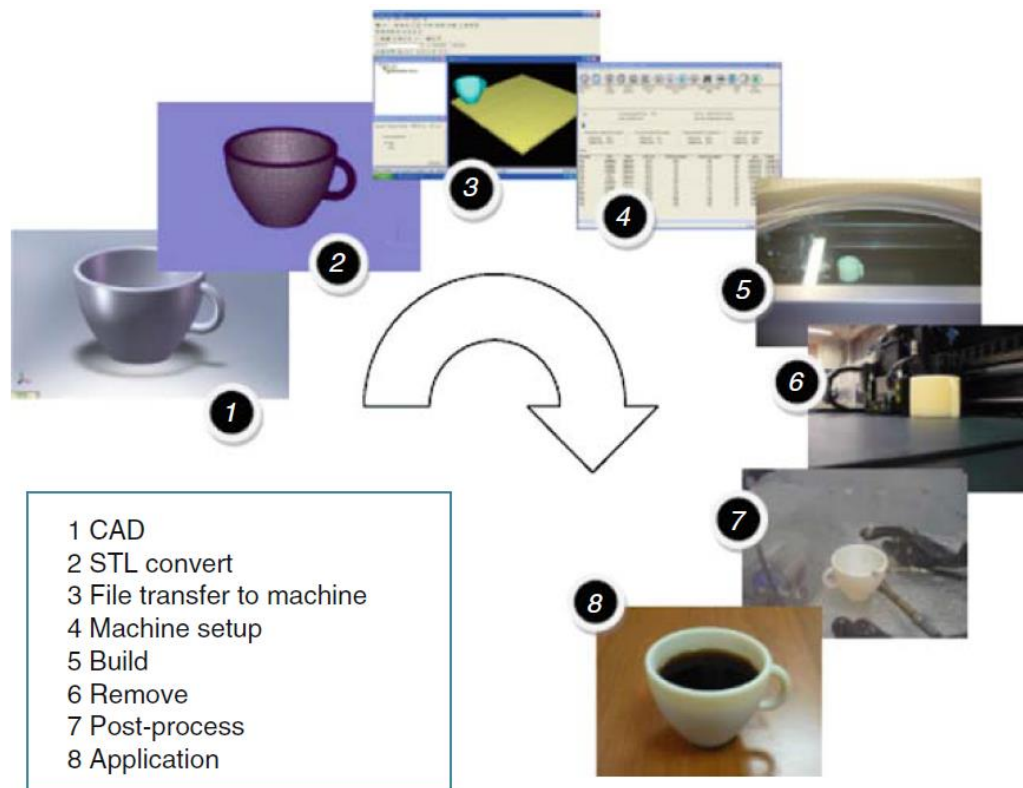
Illustration of Additive Manufacturing Processing Steps (Reprinted from [16])
